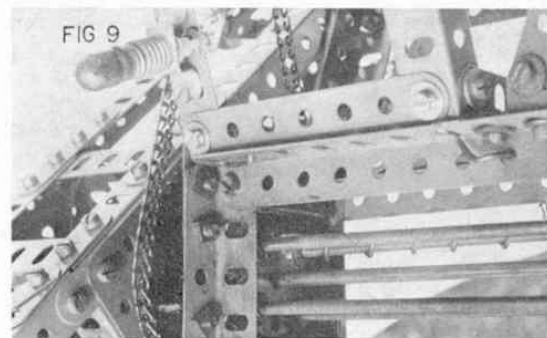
The 'cage' shaft built from Screwed Rods and stacked Wheel Discs which supports the overhanging rotating boom for the "Torpedoes" in the 'square' bearing mentioned in the text.
